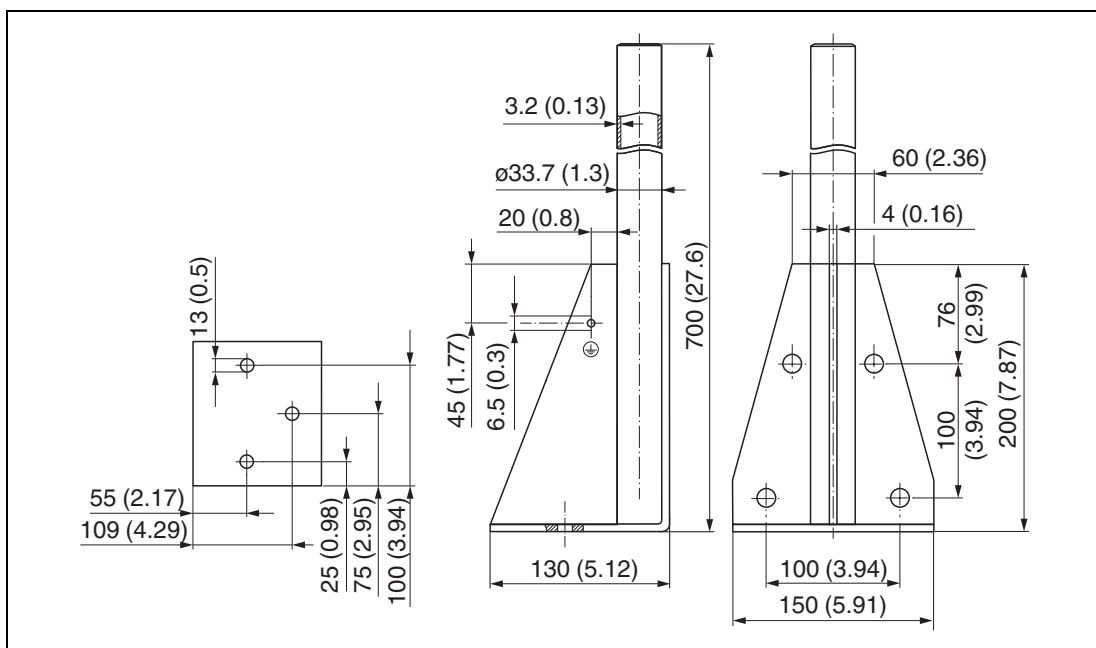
Dimensions of mounting frame (short), engineering unit: mm (inch)
